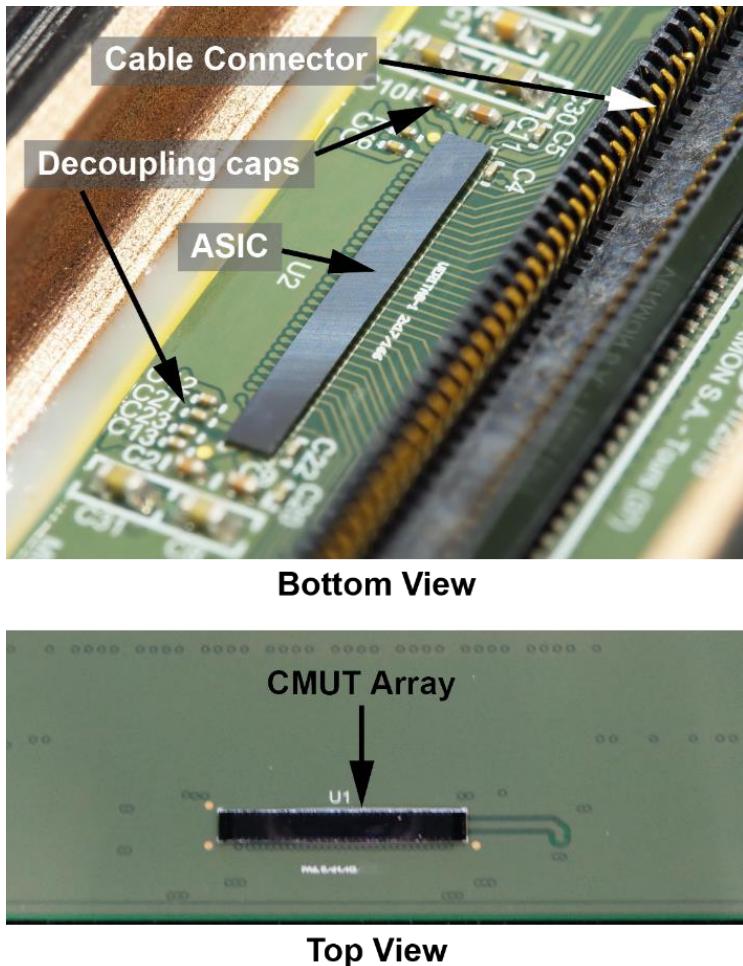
Assembled ASIC-PCB-CMUT prototype.
